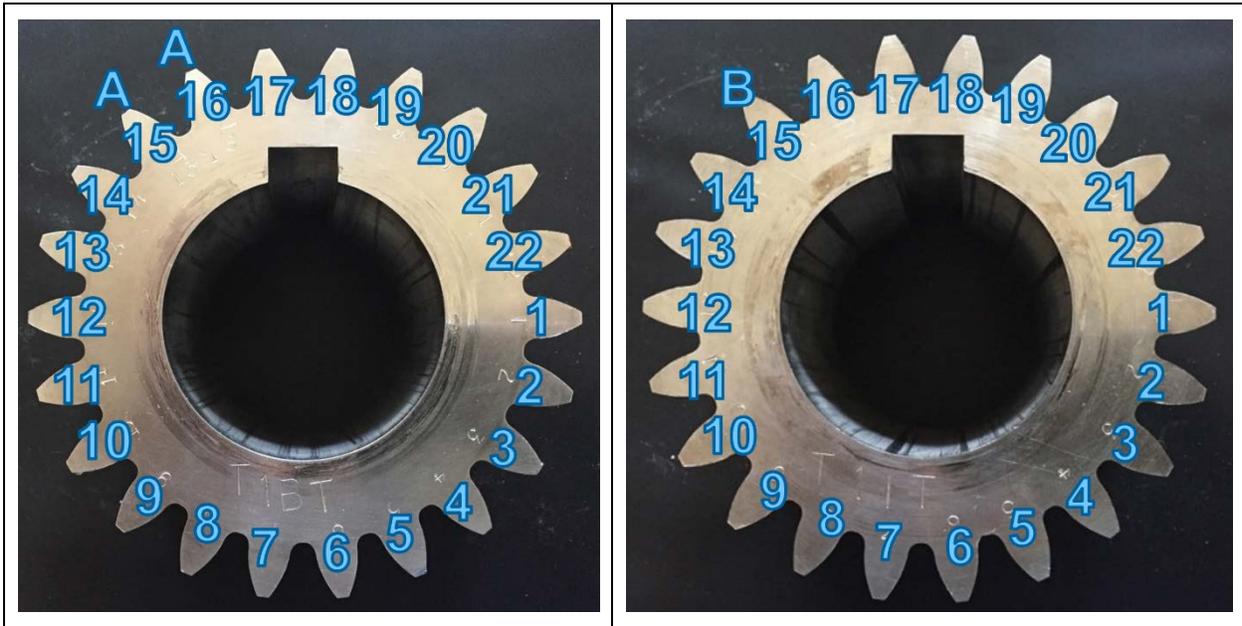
Pictures of the T1BT and T1IT gears with the gear teeth numbering labelled. The "A" and "B" notation are used to indicate where the gears mesh.
